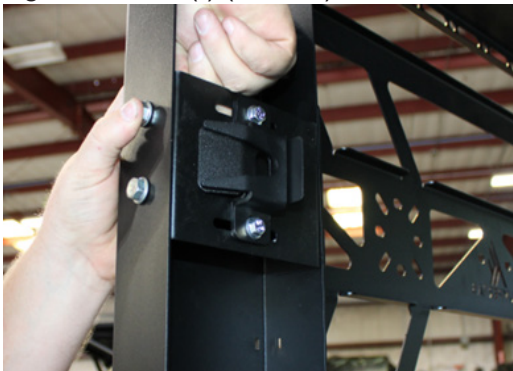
Use 13mm Socket and 13mm Wrench to fasten latch assembly to Driver Rear Column
